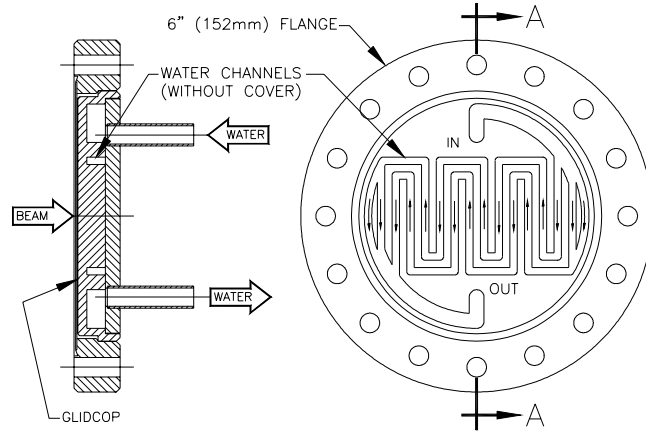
A Glidcop beam dump with a pattern of machined channels.
